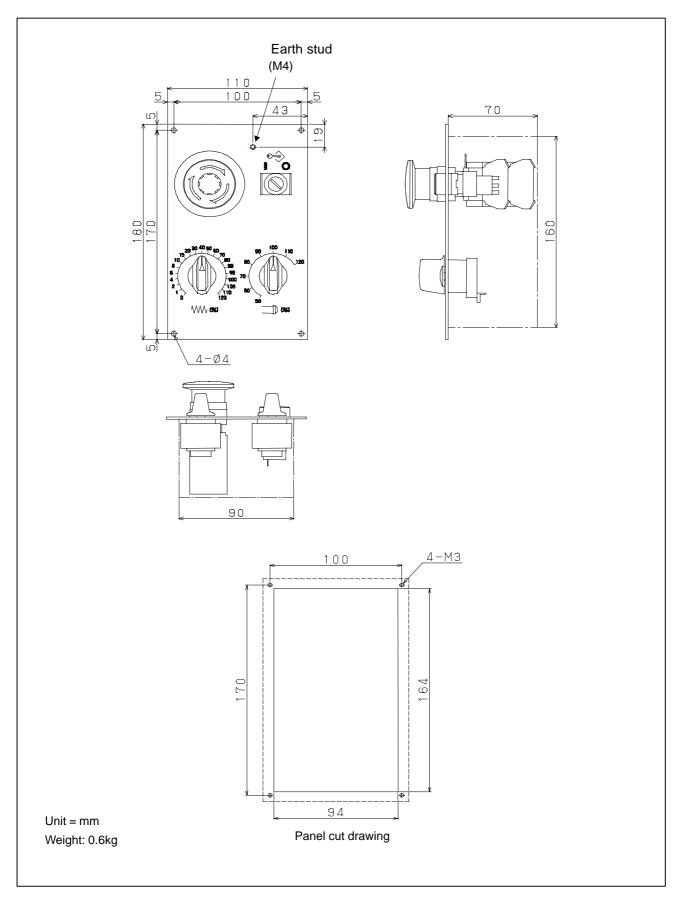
Machine operator's panel (Sub panel B1) Specification No. : A02B-0236-C235
